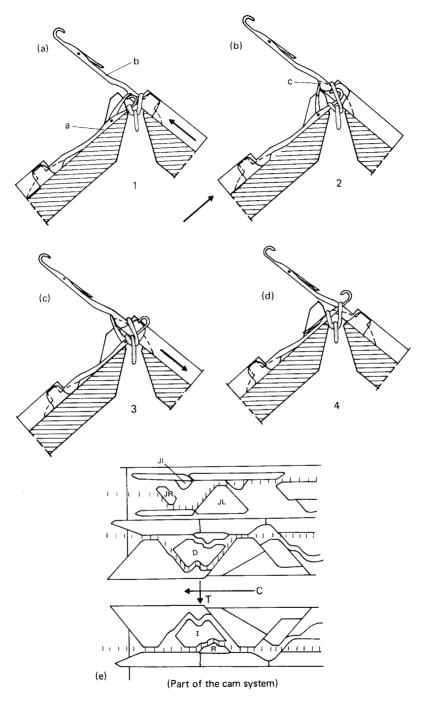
Rib loop transfer on a modern V-bed machine.
